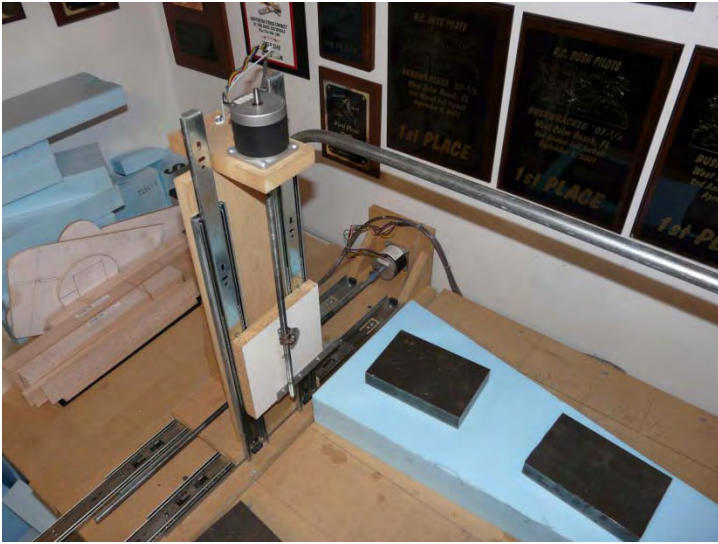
Left side of cnc hot wire showing “x” and “y” stepper motors with drive screws made of threaded rod. Notice the drawer slides.
